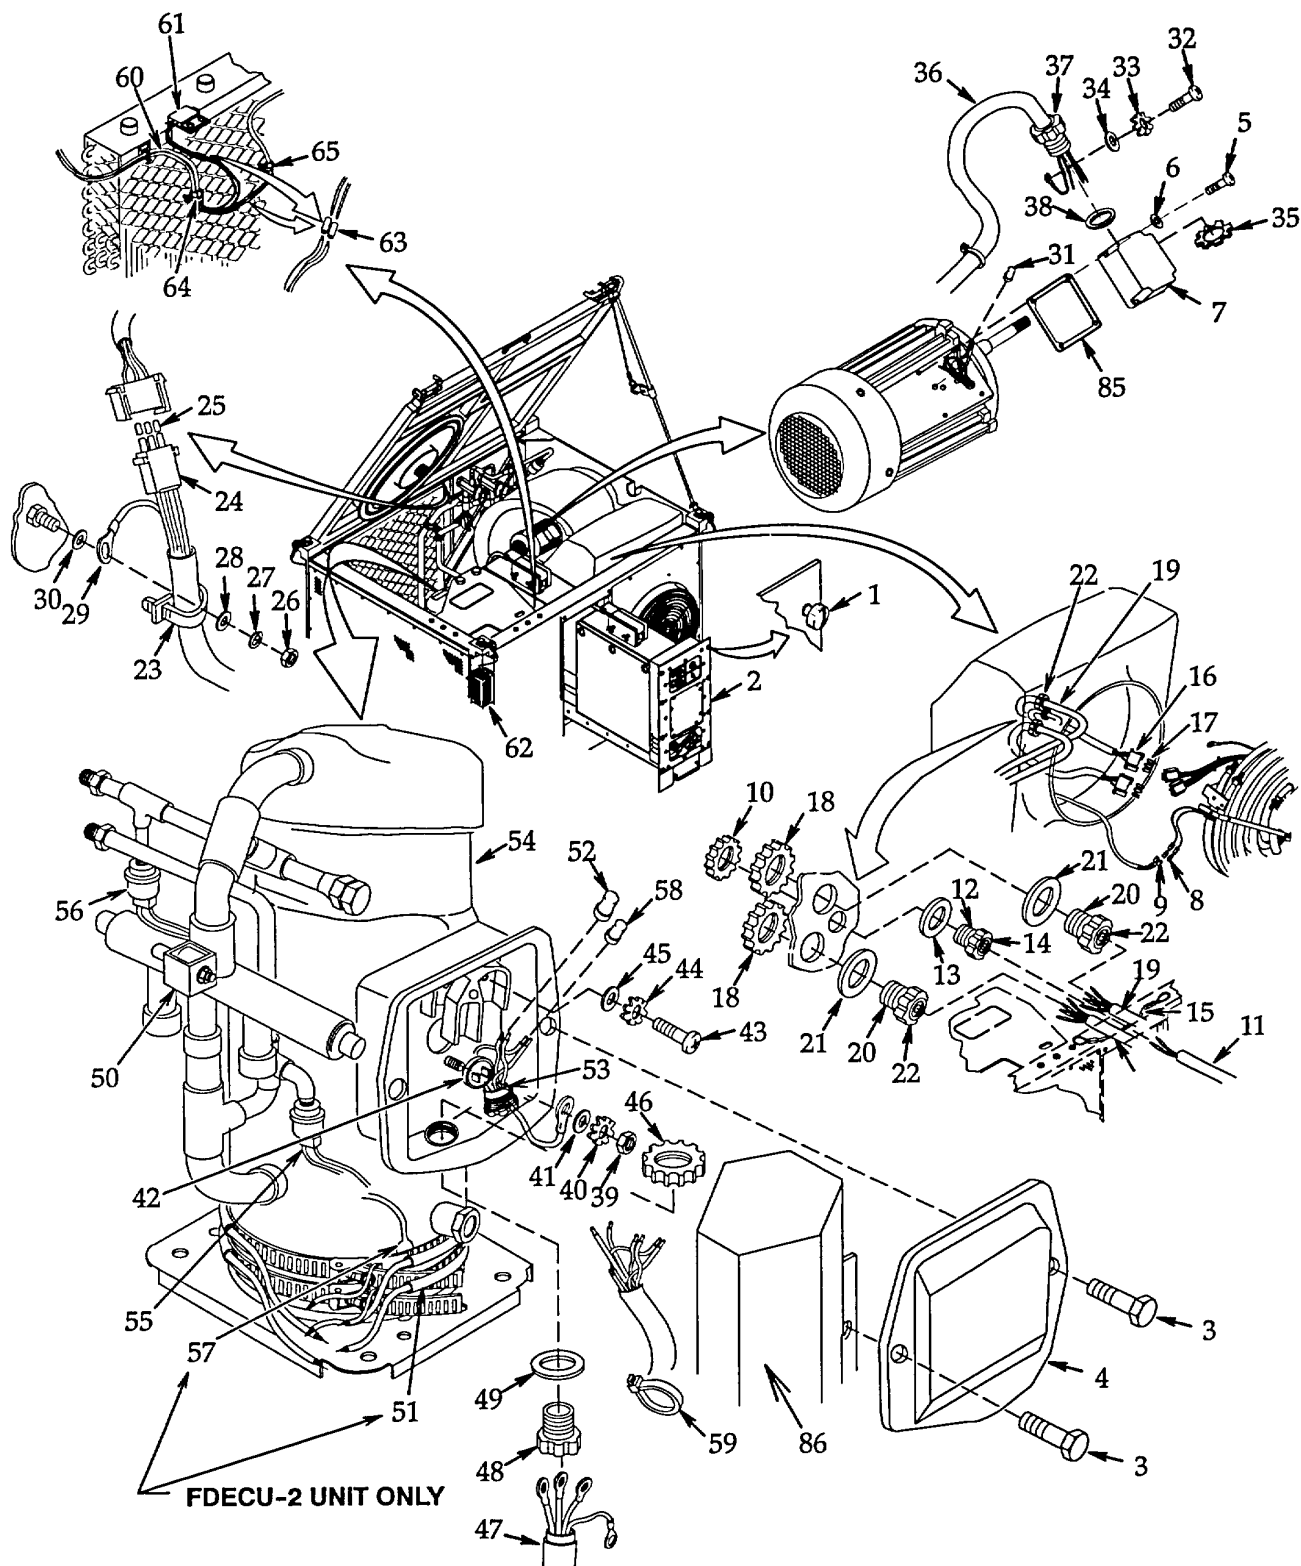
Electrical Assembly (Sheet 1 of 2).
